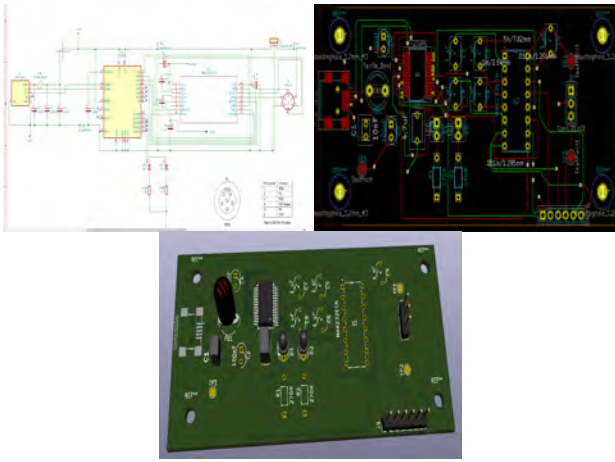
Top left is schematic of PCB, top right is the footprint, bottom is digital 3D view of PCB
